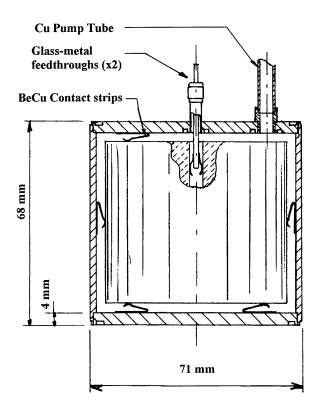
Inner container showing the ULE component, glass-metal feedthroughs, pump tube, and the BeCu contact strips.
